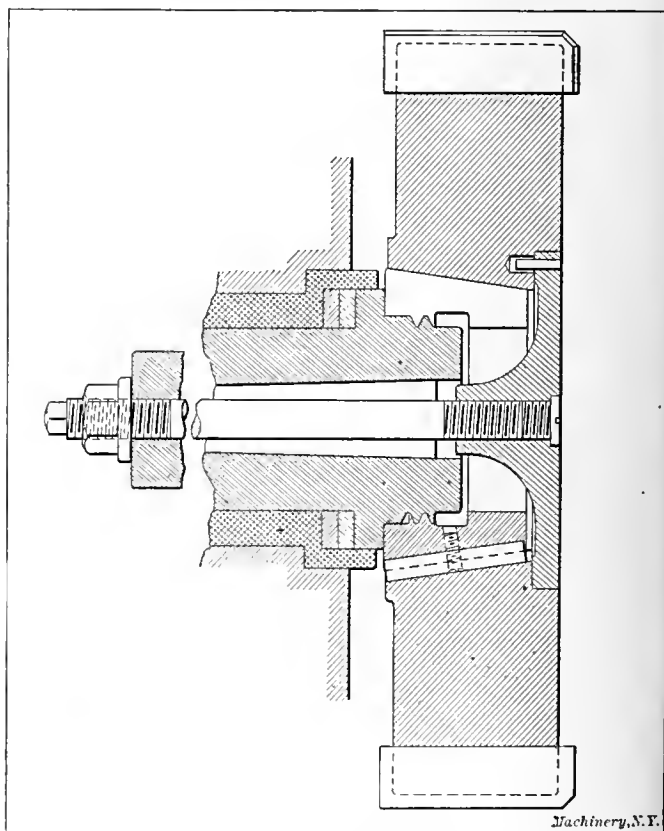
Section through Milling Cutter Mounted in Place on Spindle Nose
